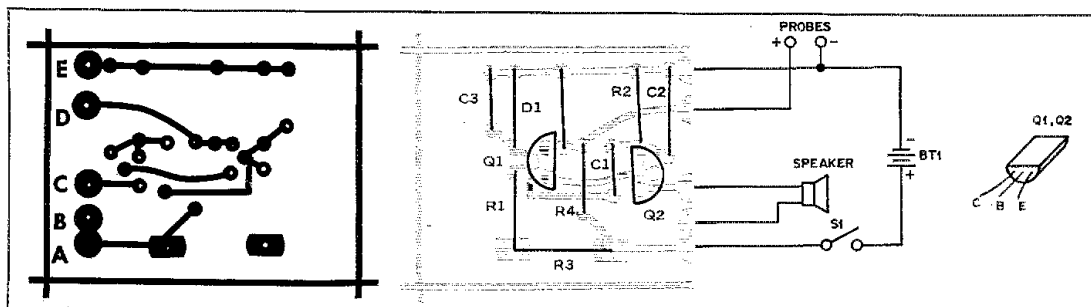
Shown here are the ACT pc board template (left) and parts placement diagram (right). Shown from the foil side, the template is reproduced full size with black representing copper. Parts located on the placement drawing are shown from the non-foil or component side of the board.
